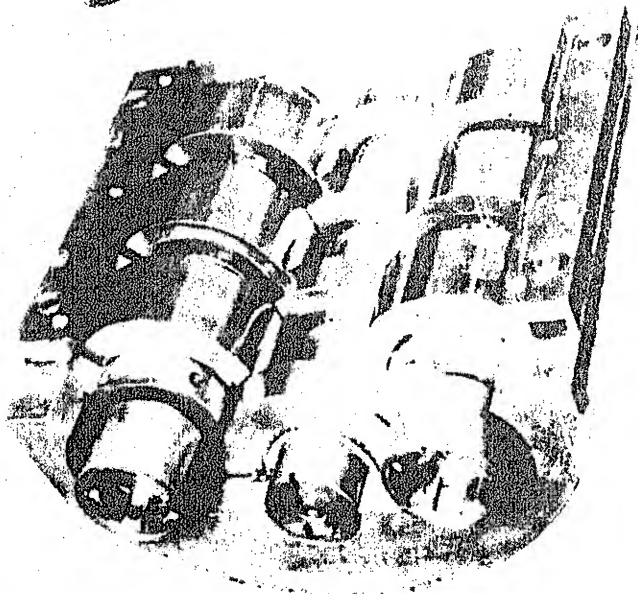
Rollcradle arrangement and rolls of the Sendzimir Mill
